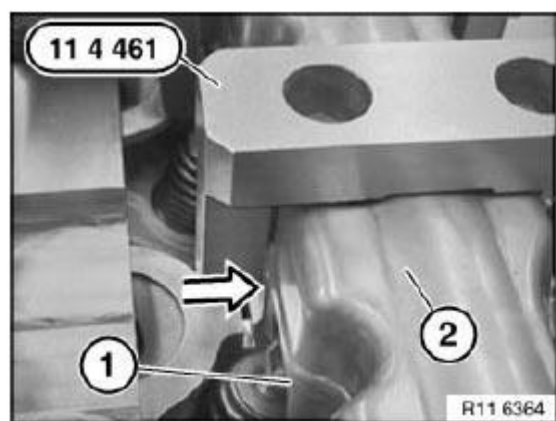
Identifying Screw, Upper And Lower Bearing Bank With Special Tool (11 4 461)
